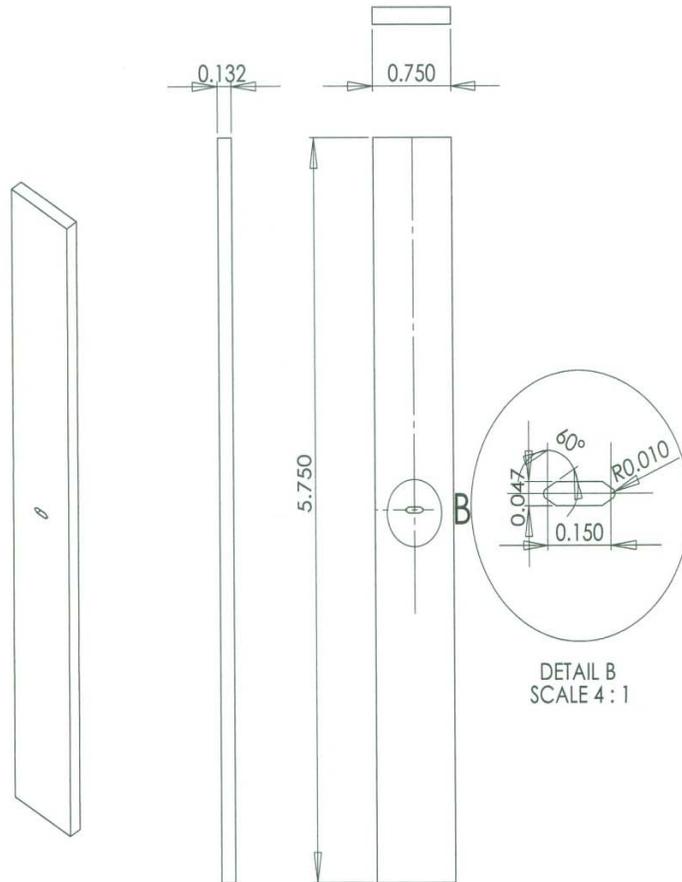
Fatigue Crack Growth Test Specimen Geometry with Notch Details (Courtesy of TRL)
